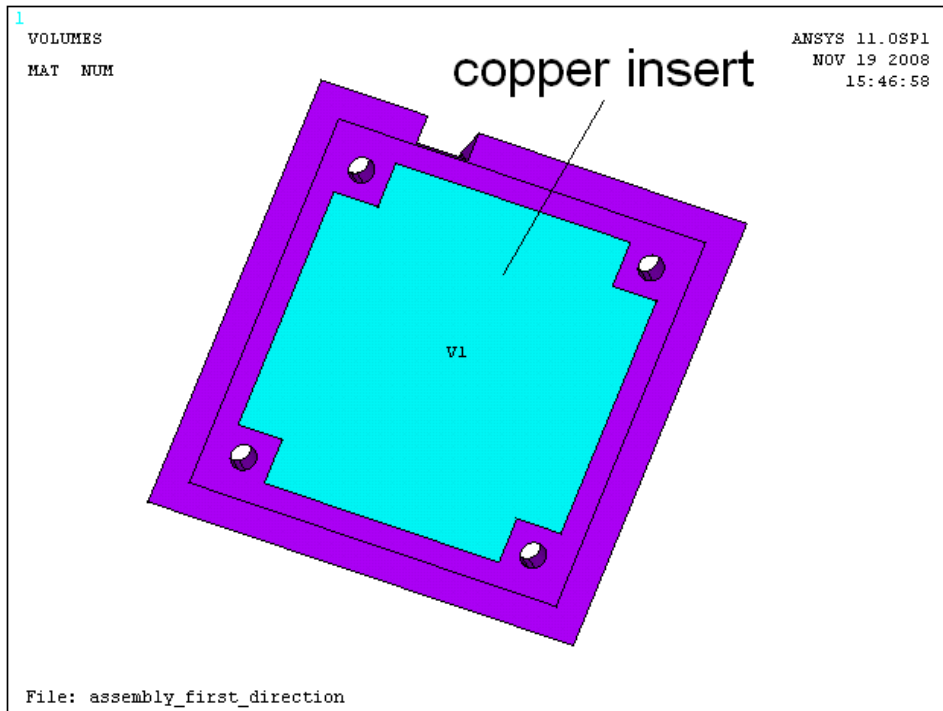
Platform with copper insert (bottom side). Outer welding (configuration c)
